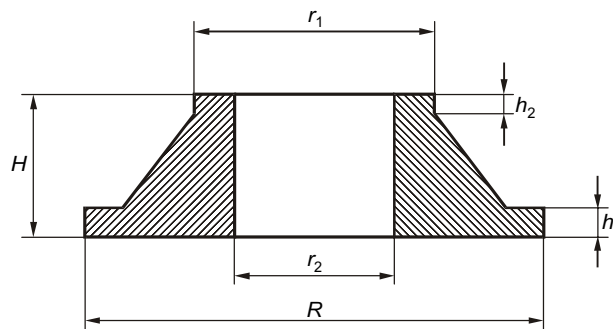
Shape and dimensions of Welding Neck type ring
